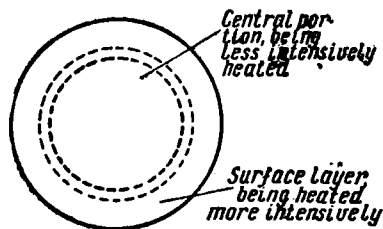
Diagram showing the change in dimensions of various layers in a cylindrical forging being heated uniformly.
